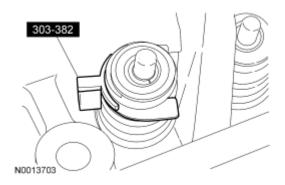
Installing Special Tool Between Valve Spring Coils Courtesy of FORD MOTOR CO.
